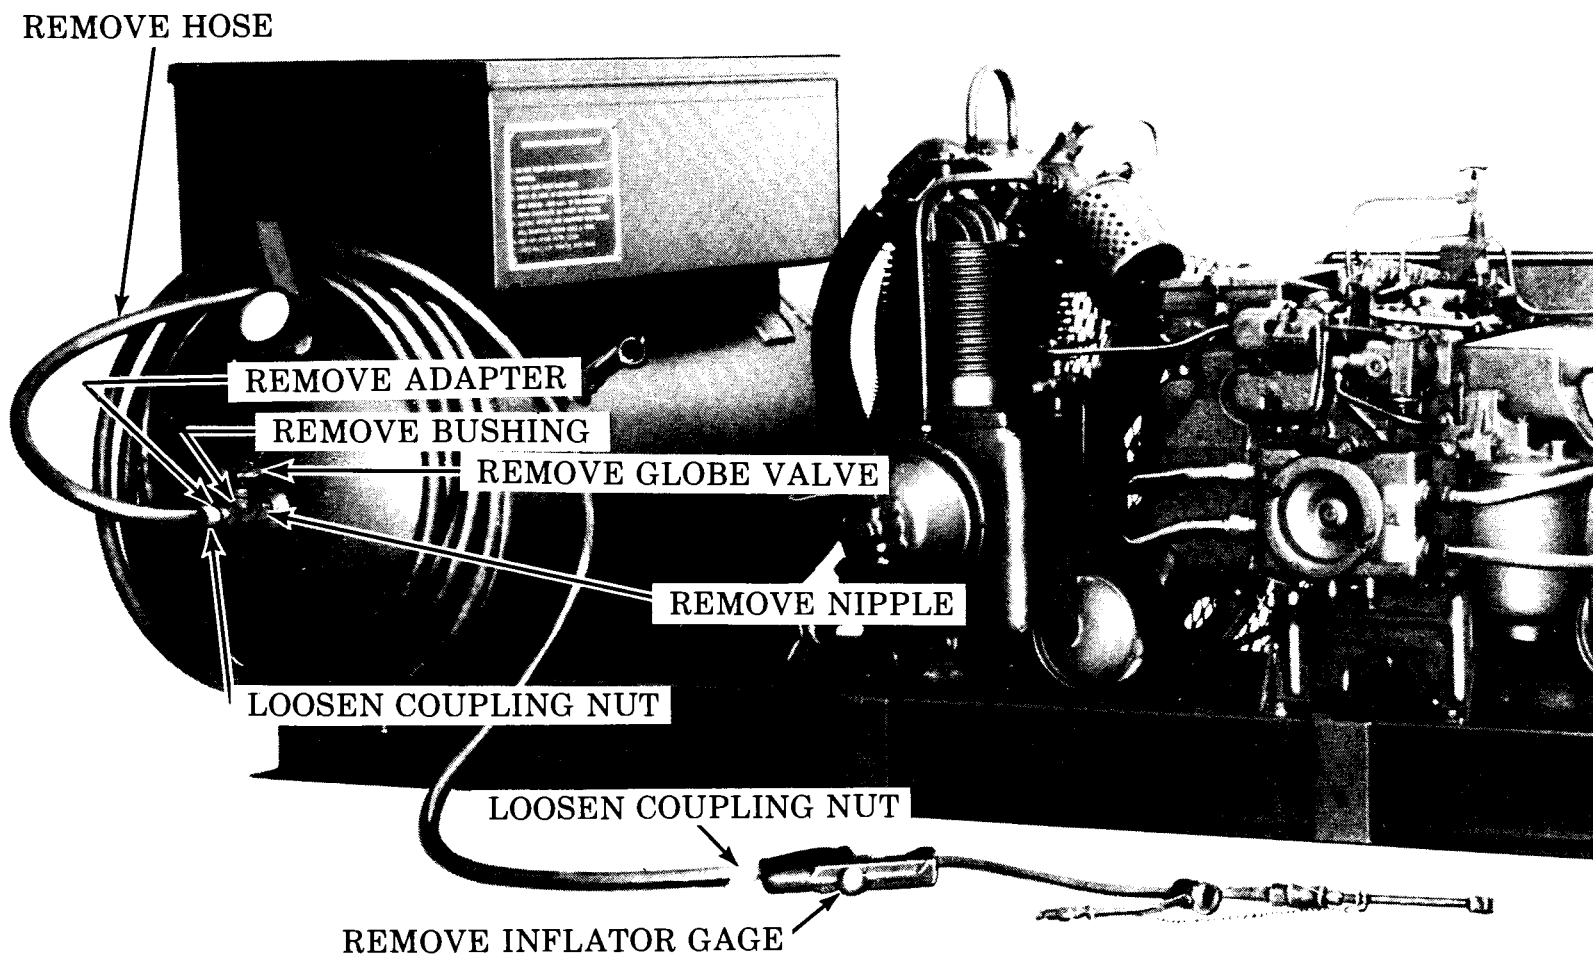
Globe valve, air hose assembly and inflator gage, removal and installation.
